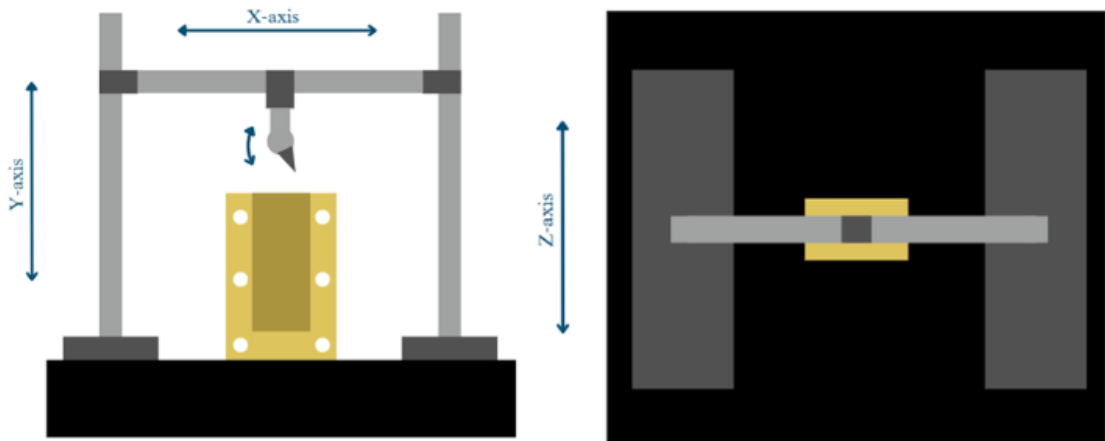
The setup of coordinate measuring machine (CMM) - side and top view
